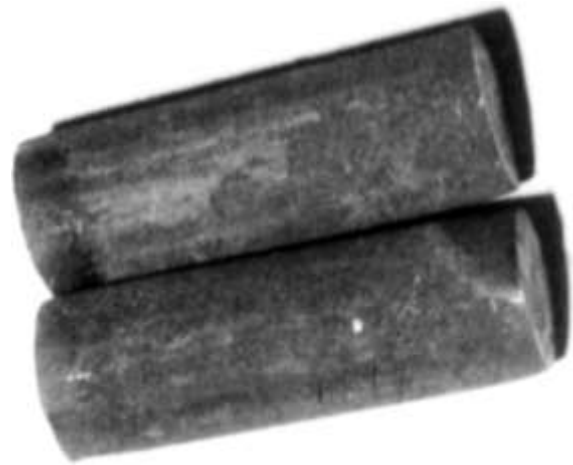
Workpieces of 37Cr4 steel cut in the stamp of new design
